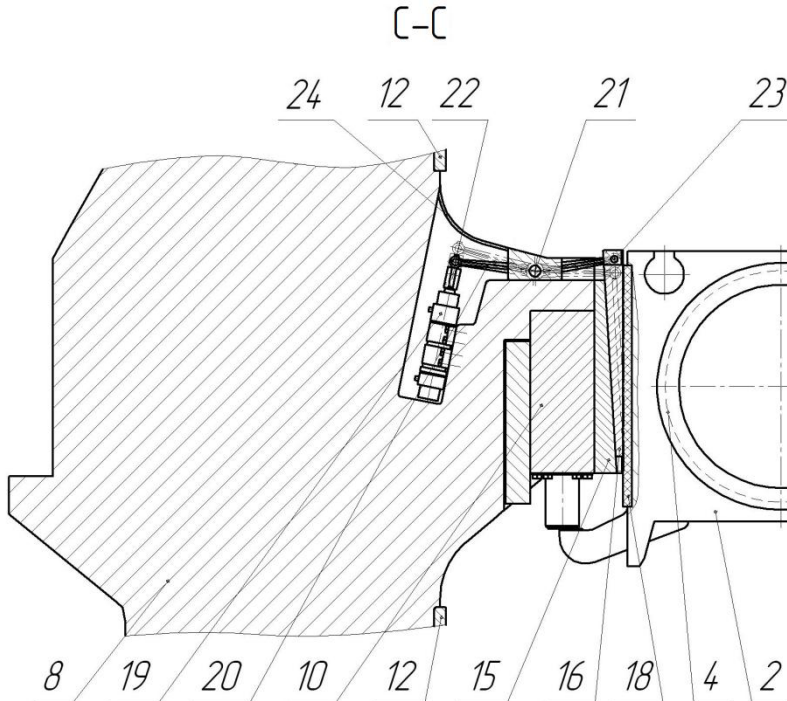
General view of the rolling stand with devices for making horizontal wedge thrust from operator side.
